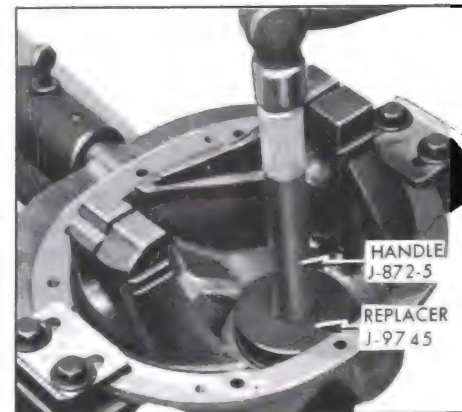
Installing Rear Pinion Bearing Outer Race
